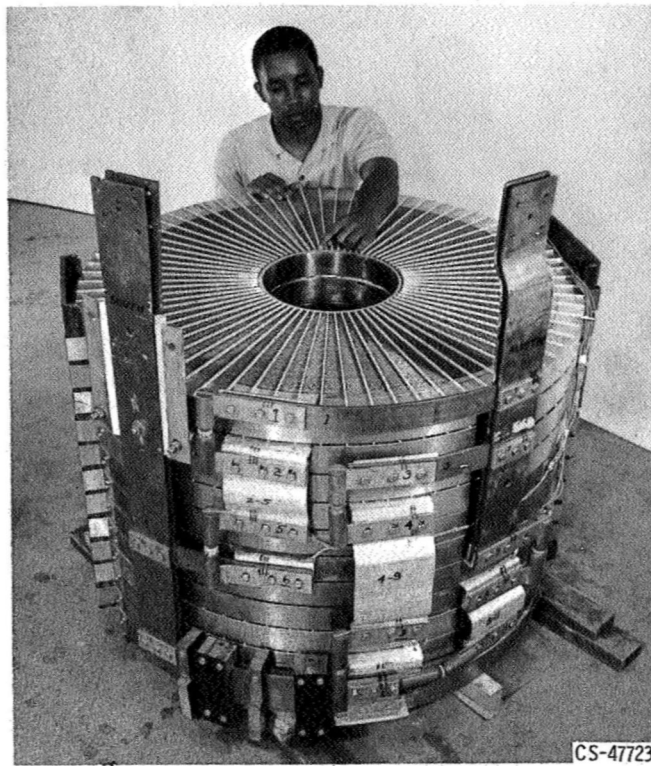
Neon-cooled electromagnet coil assembly.
